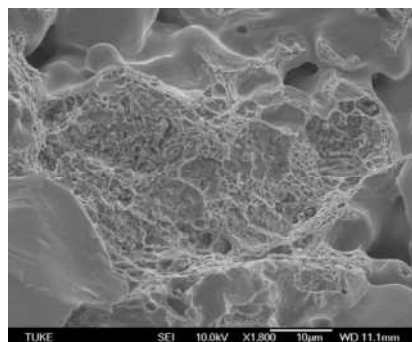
Fracture surface of material cooled at 0.235 K/s rate
